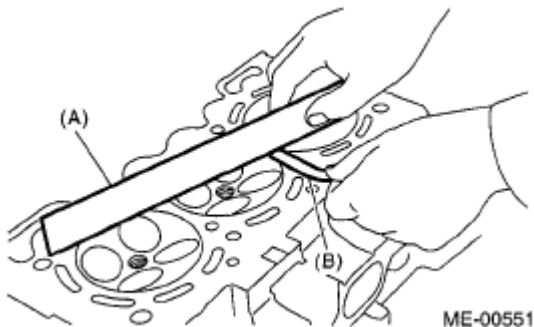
Measuring Flatness Of Cylinder Head Surface
